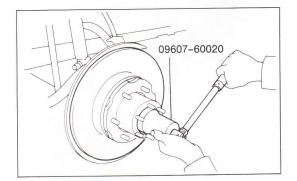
Toyota service tool being used to remove adjusting nut from stub axle.
